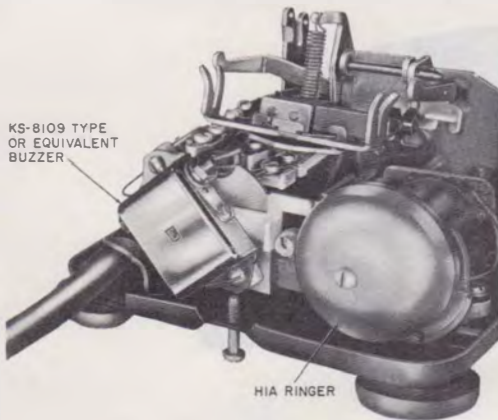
KS-8109 Type Buzzer Mounted on Bracket of H1A Ringer
